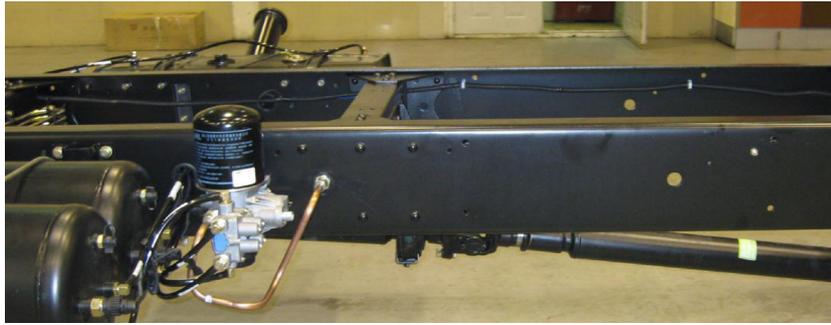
FAW truck frame comprising longitudinal beams made from grade 590L steel
